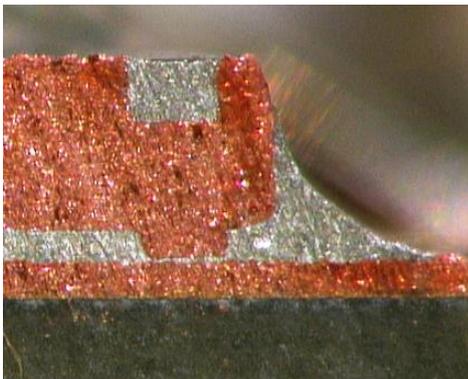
Partial cross section of a terminal solder joint showing the new implemented spacers resulting in homogenous solder thickness.
